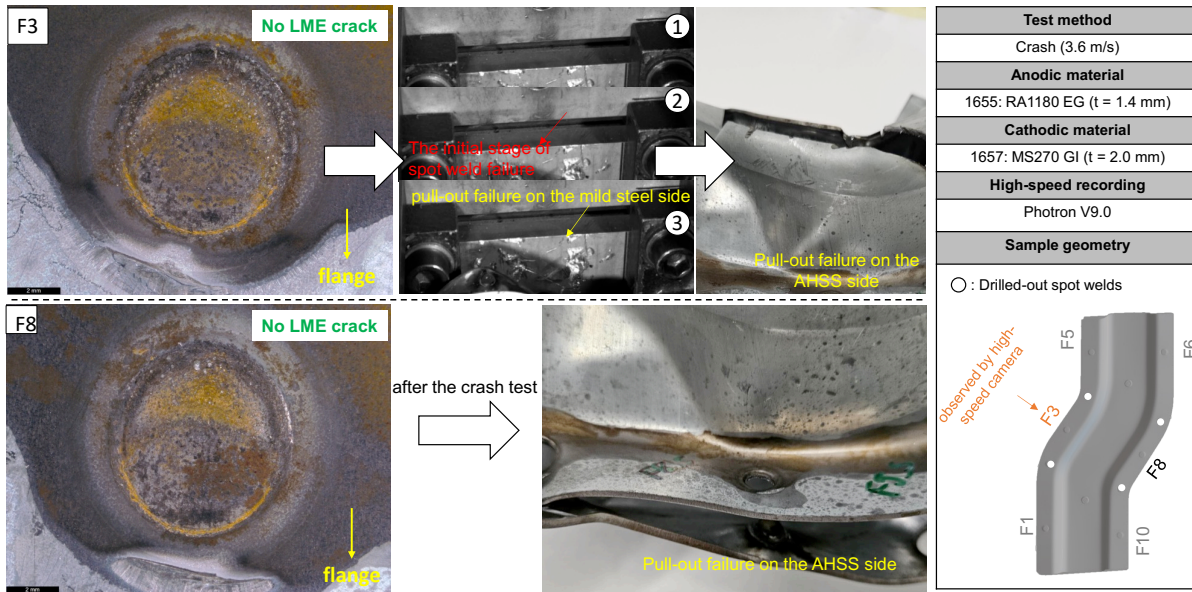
Spot weld failure in sample 31 (MTC6)
